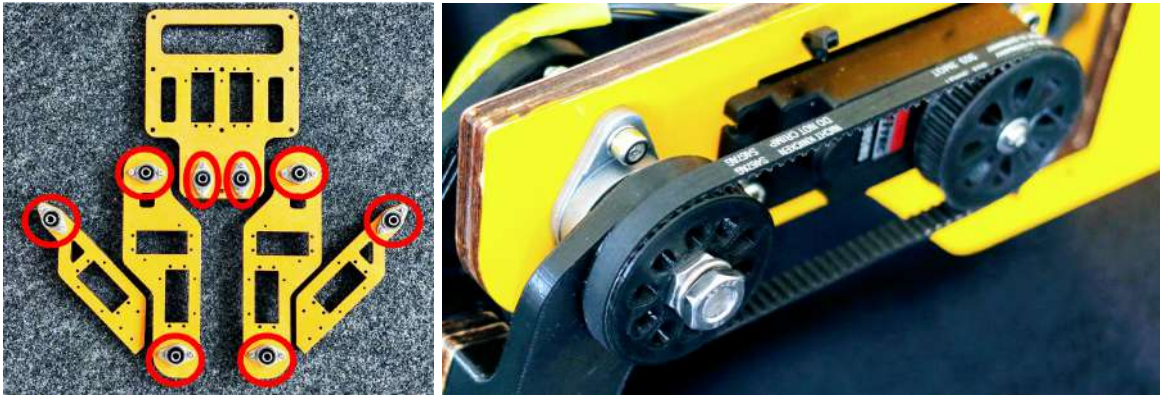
On the left side: Bearings mounted on the wooden parts, marked with the red circles. On the right side: A toothed belt connecting a joint and an actuator. Both pictures were taken from the assembly documentation [40].
